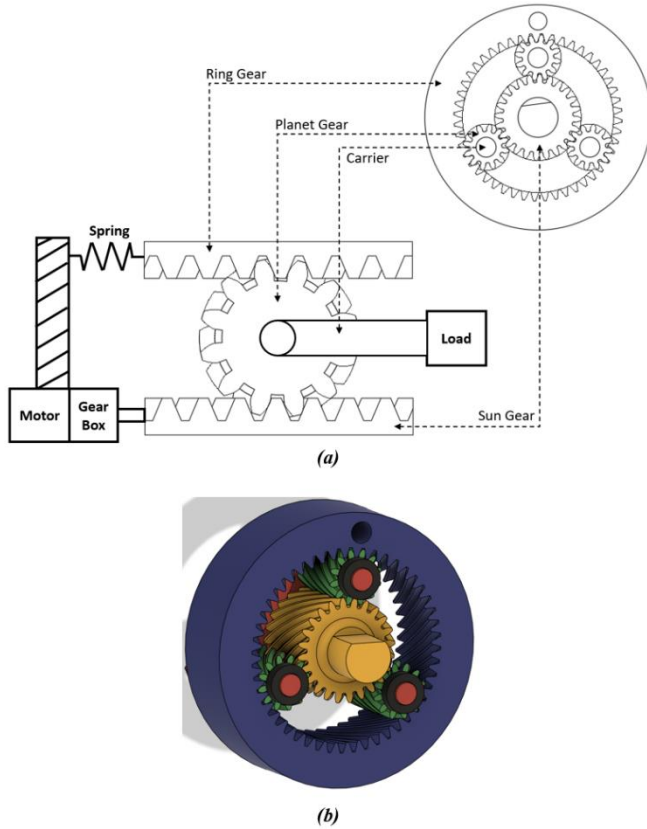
(a) Rotary-to-linear motion projection schematic of the planetary SEA system. (b) Helical gears used in the planetary gear system.
